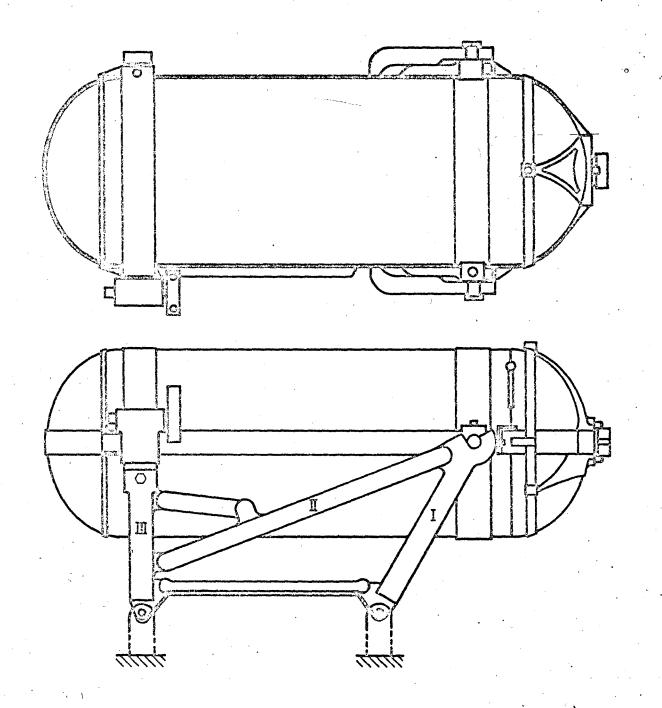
PHYSICAL MODEL OF THE CASK ASSEMBLY AND THE MOUNTING STRUCTURE
